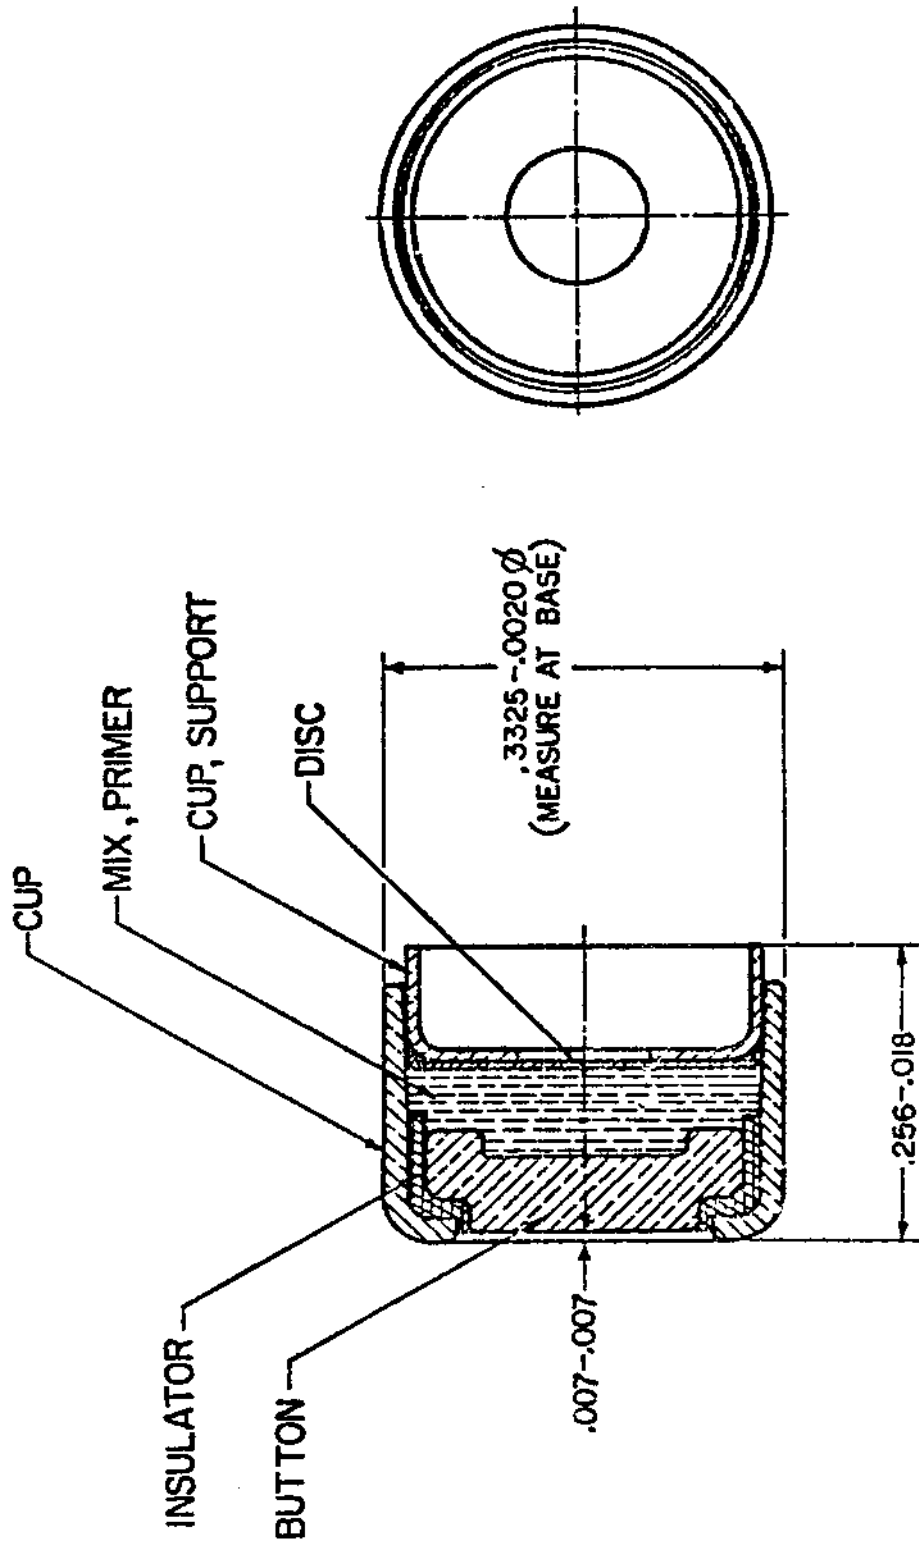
Cross sectional view of 20mm electrically initiated primer, Model M52A3B1.
